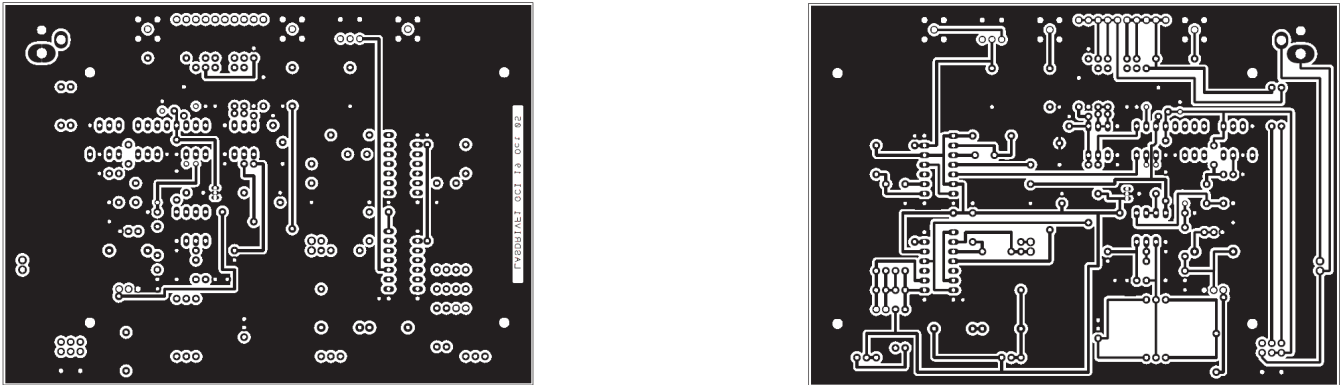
The upper, component (left) and lower track (right) printed circuit board layouts, scale 2:1.
